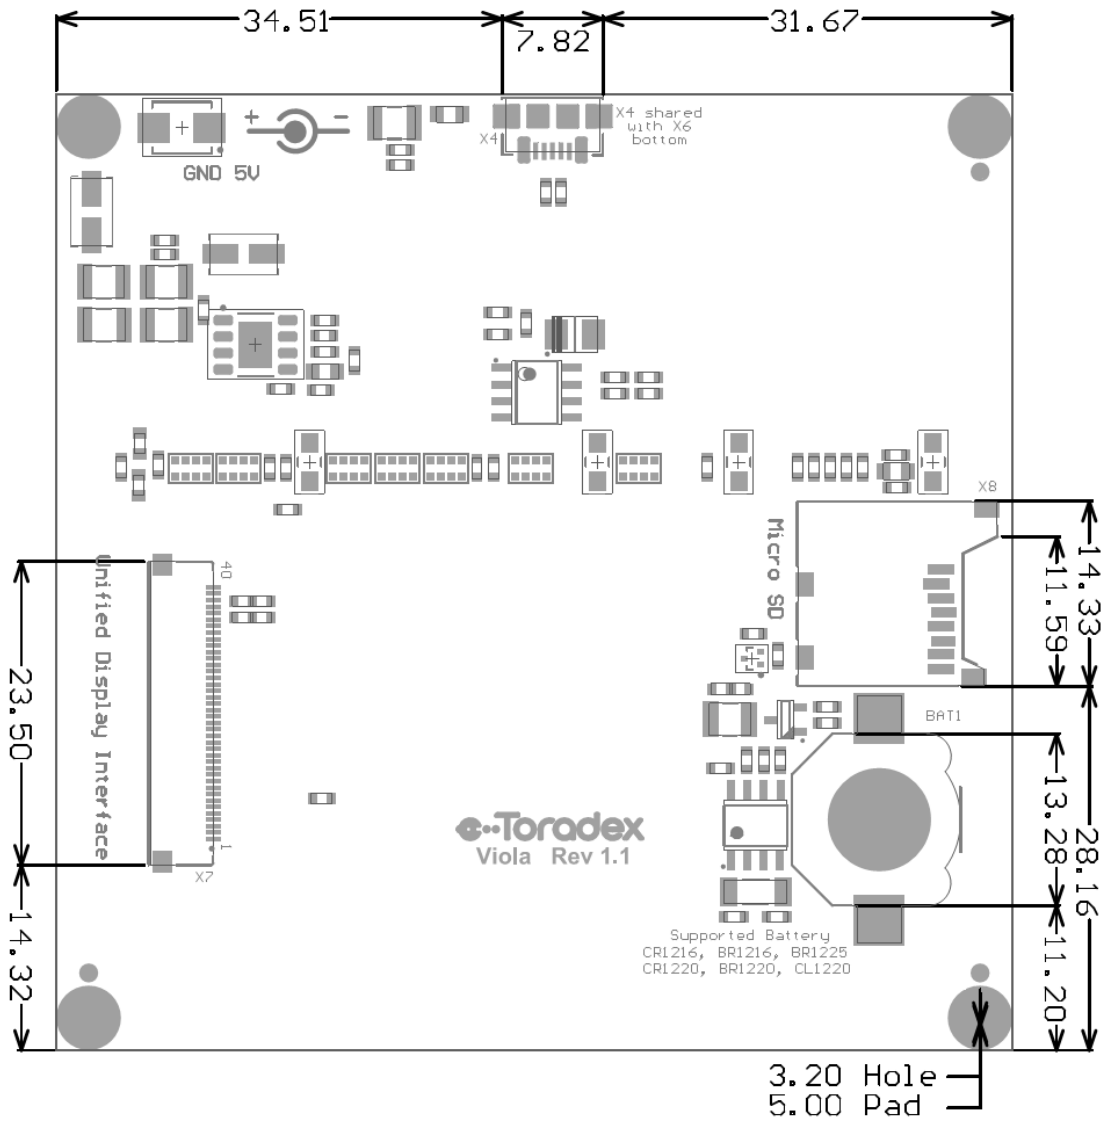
Viola Dimensions – Bottom Side, all dimensions are in millimetres (mm)
